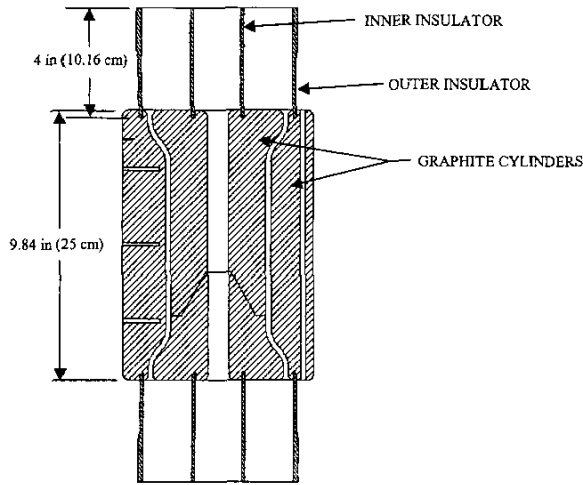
Cross-sectional drawing of assembled graphite electrodes and alumina insulators.
